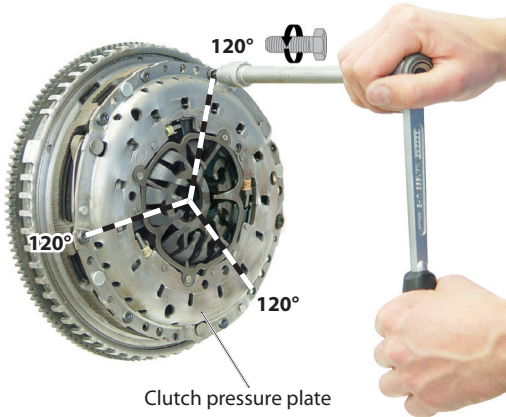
Screwing in the threaded pin "3", "4" or "5".
